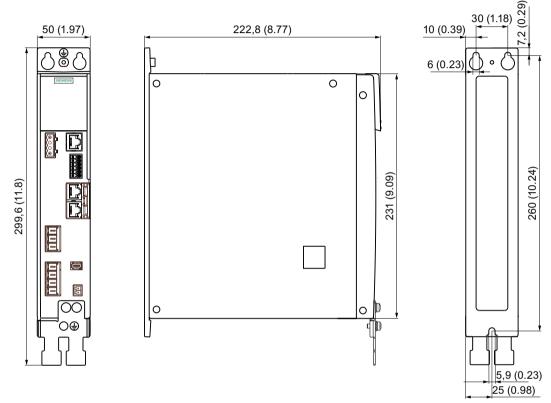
Dimension drawing SINAMICS S210 FSA, 3 AC, dimensions in mm (inch)
